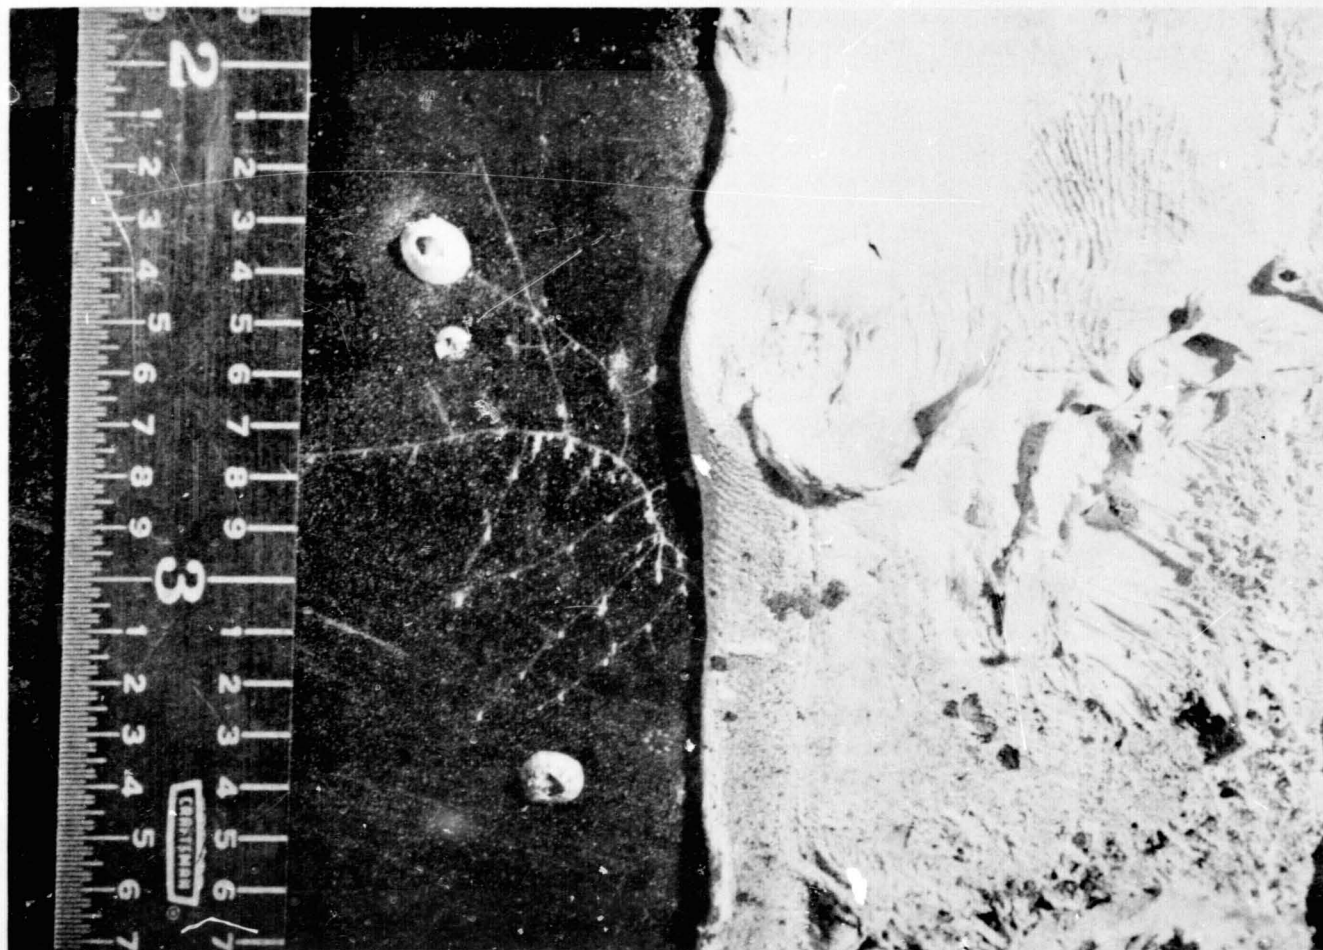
SRB watertight black box/cable assembly No. 2 after ITB testing (note barnacles).
